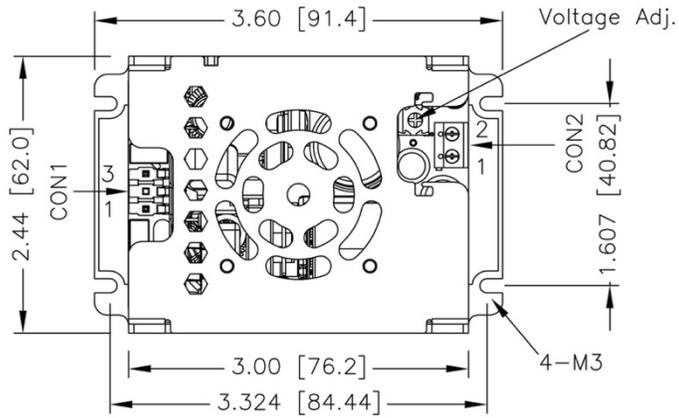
XLO180 models: Mounting Hole Locations and Dimensions
